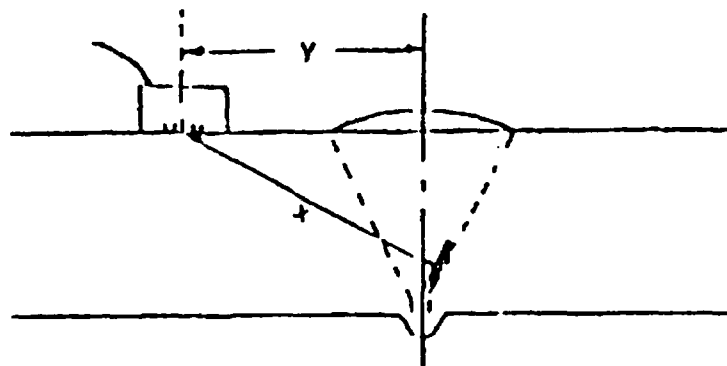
a : Probe movement for sizing of defects in welds.
